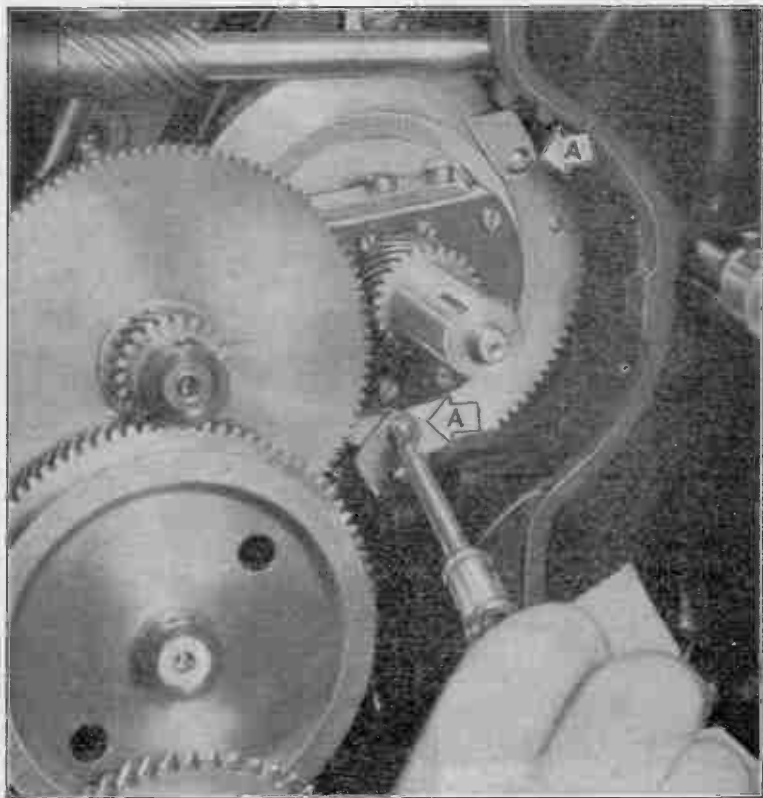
Simplex projector mechanism. In the figure A, represents intermittent retaining clamps.
